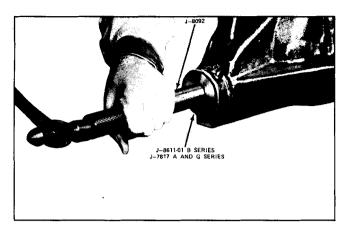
A-31 Installing Front Pinion Bearing Outer Race
